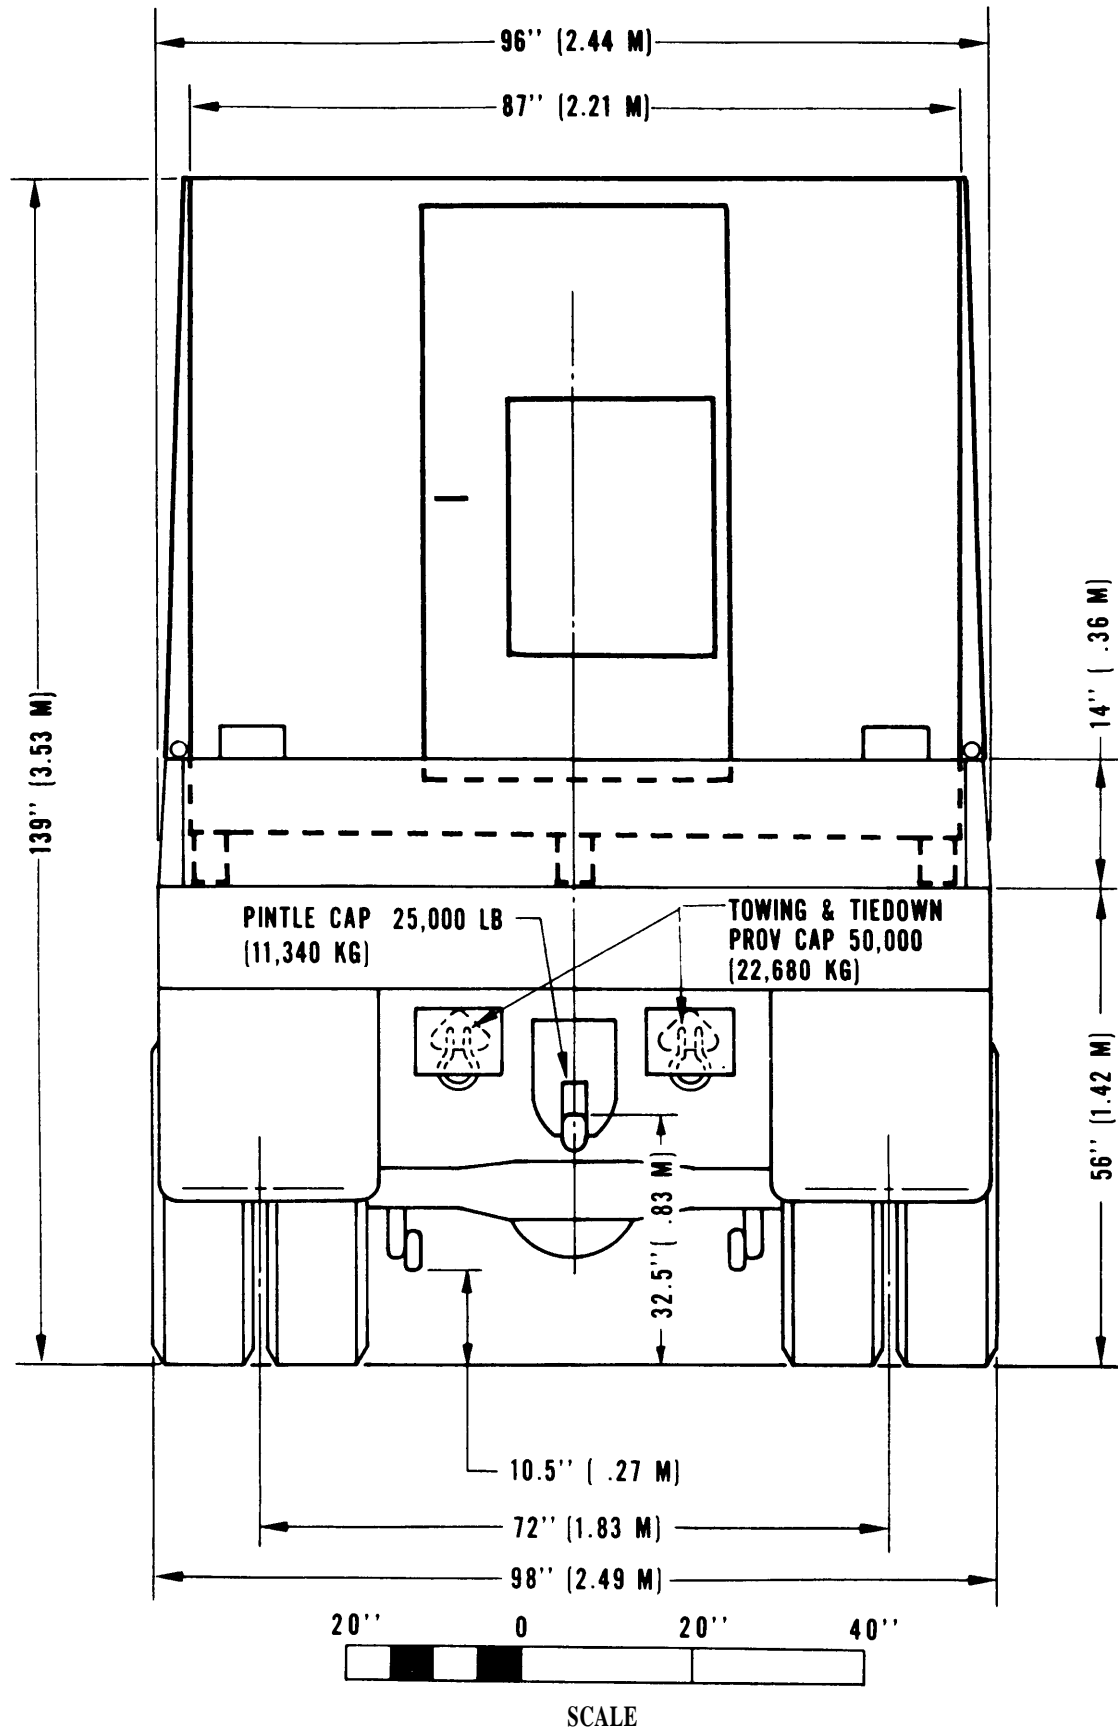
Rear elevation, truck, cargo, M813A1, with shelter.
